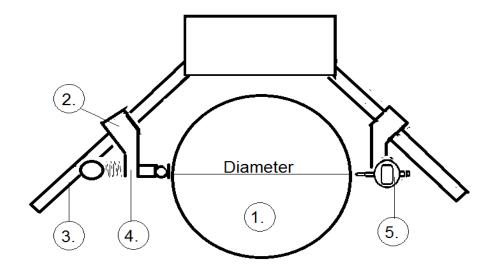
Cross-section of the thesis device. (1) Roll. (2) Movable mount. (3) A rod with a track for the mount. (4) Adjustable counterpart. (5) The dial-indicator.
